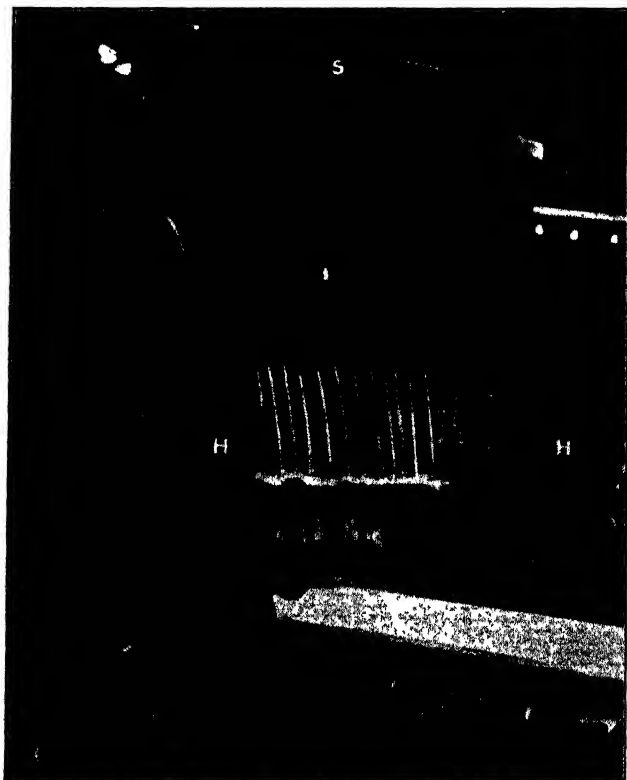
Two-high reversing blooming mill. *S*, screw-down mechanism. *H-H*, roll housings. (Courtesy of United States Steel Corp.)
